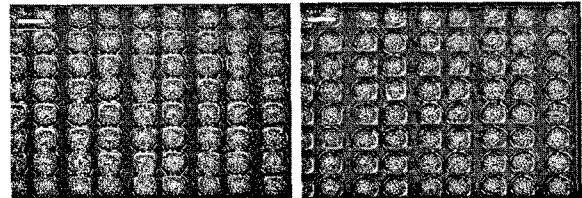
Failure images bridges(a) and poor solder(b) on circle hole shape
